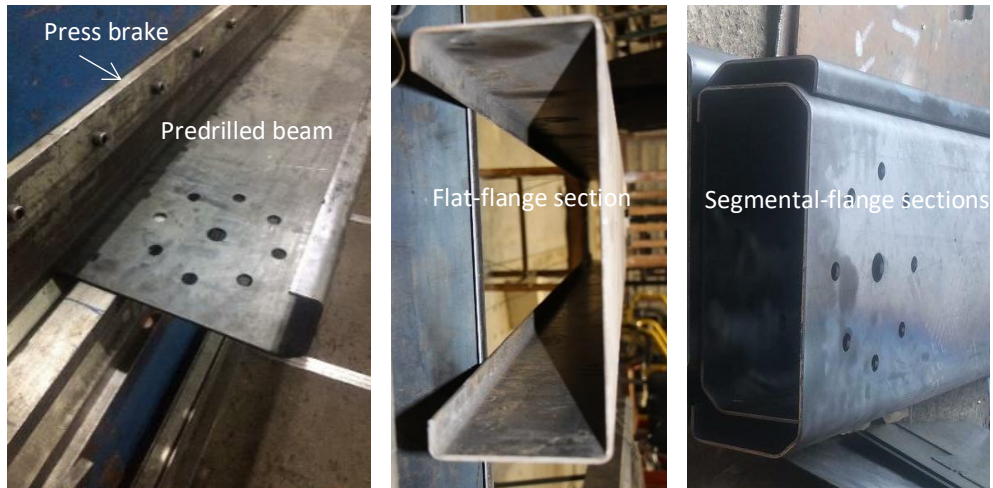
Fabrication of flat-flange and segmental-flange beam sections using press brake.
